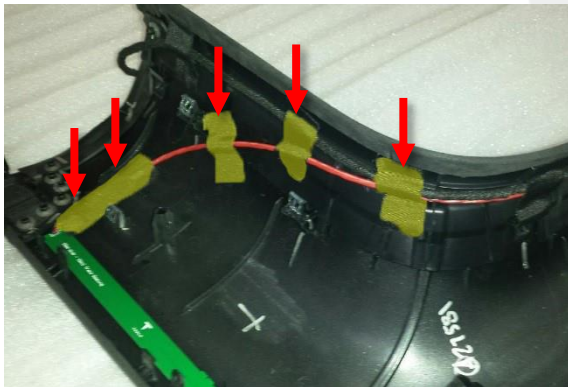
(Front corner, RH rear upper door trim panel; tape strips highlighted)
